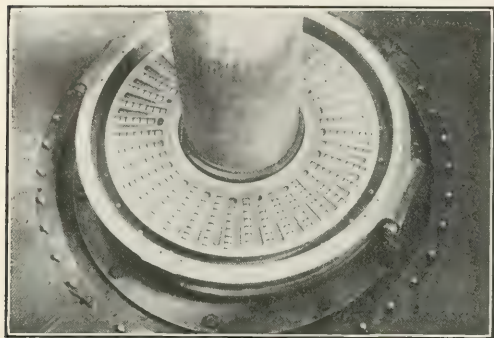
ROLLER BEARING FOR MAIN TURBINE UNIT
